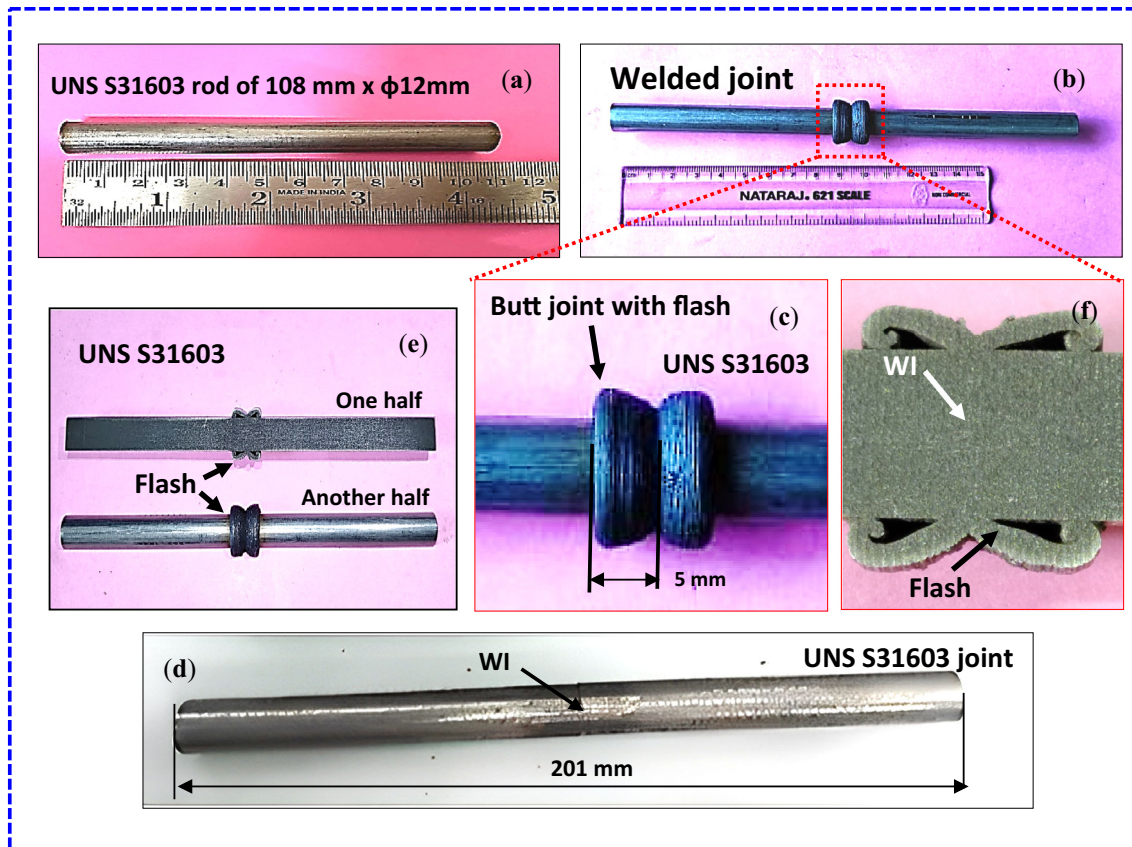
(a) specimen before facing and welding, (b) weldment after welding before machining, (c) flash-butt, (d) similar weld joint after machining, (e) two halves of the welded sample and (f) cross-section of the weld.
